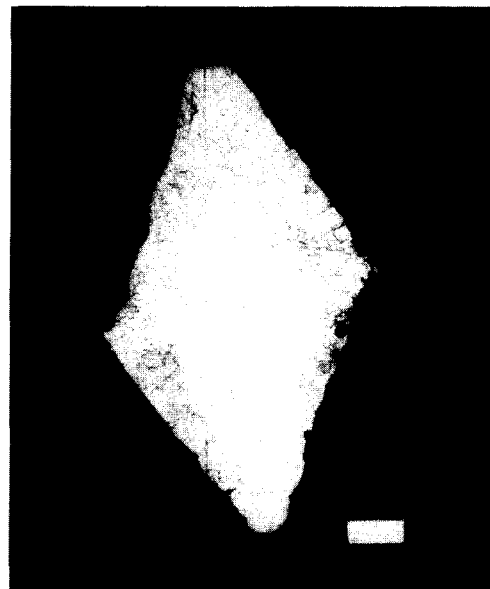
Corrosion attack of Pb–Ca–Sn–Al (A907) alloy (reference bar 440 μm). Cross section of diamond-shaped interior wire member of the grid. Uniform corrosion without localized macro-pitting.
